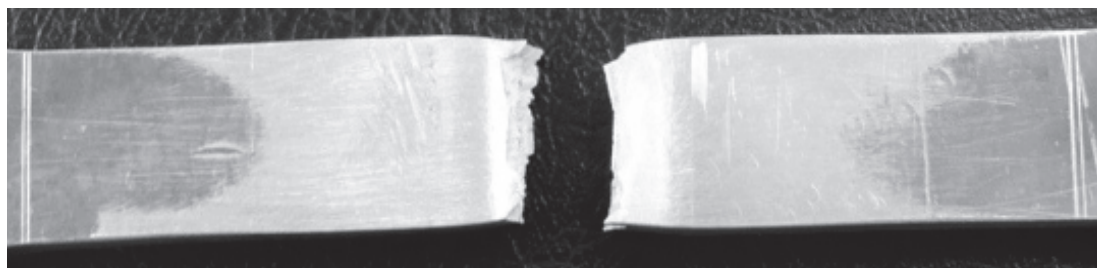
Sample view of 7020 alloy welded by MIG subjected to the static tensile test - a crack in the weld
